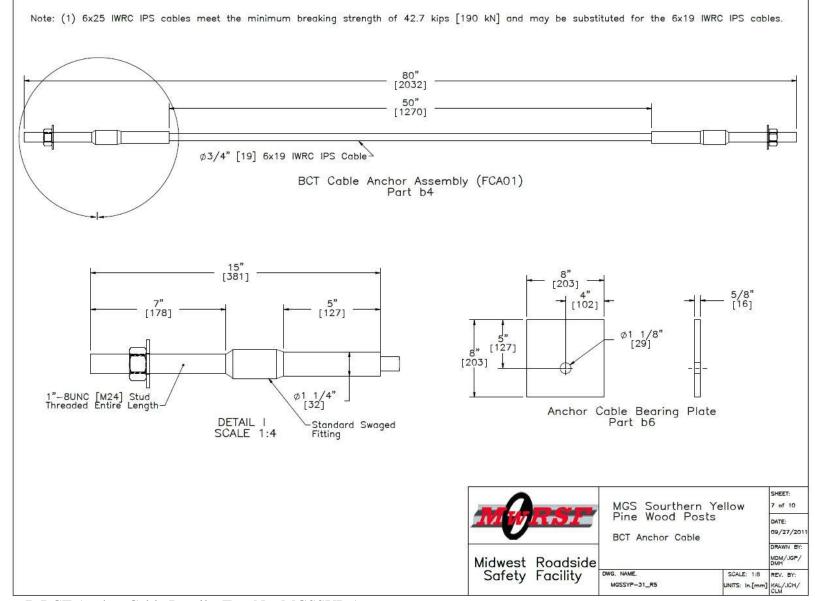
BCT Anchor Cable Details, Test No. MGSSYP-1
